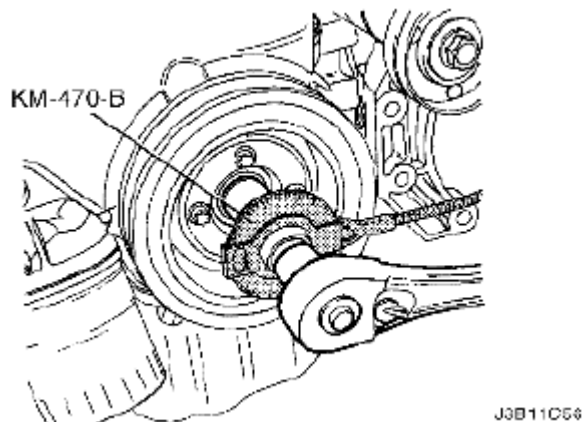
Identifying Angular Torque Gauge (KM-470-B)
